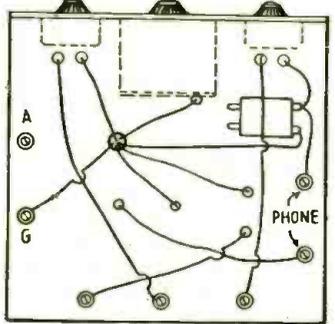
BOTTOM VIEW WIRING LAYOUT
